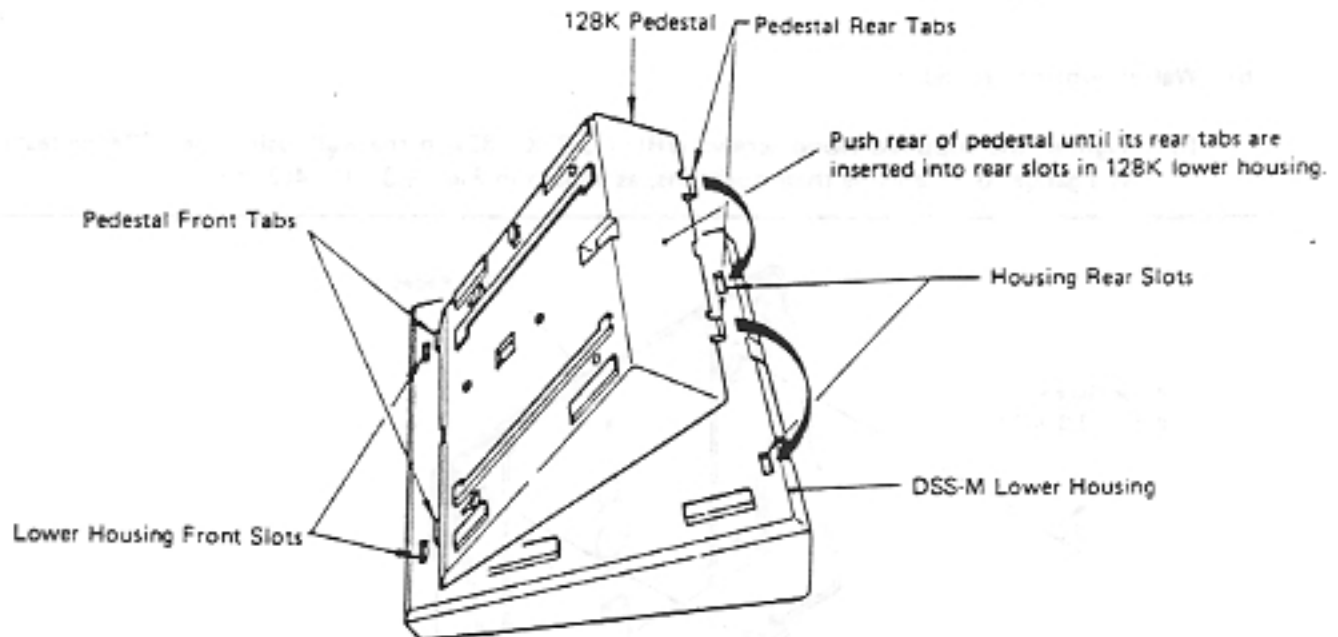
(2)(a)A 128K Pedestal Mounting
